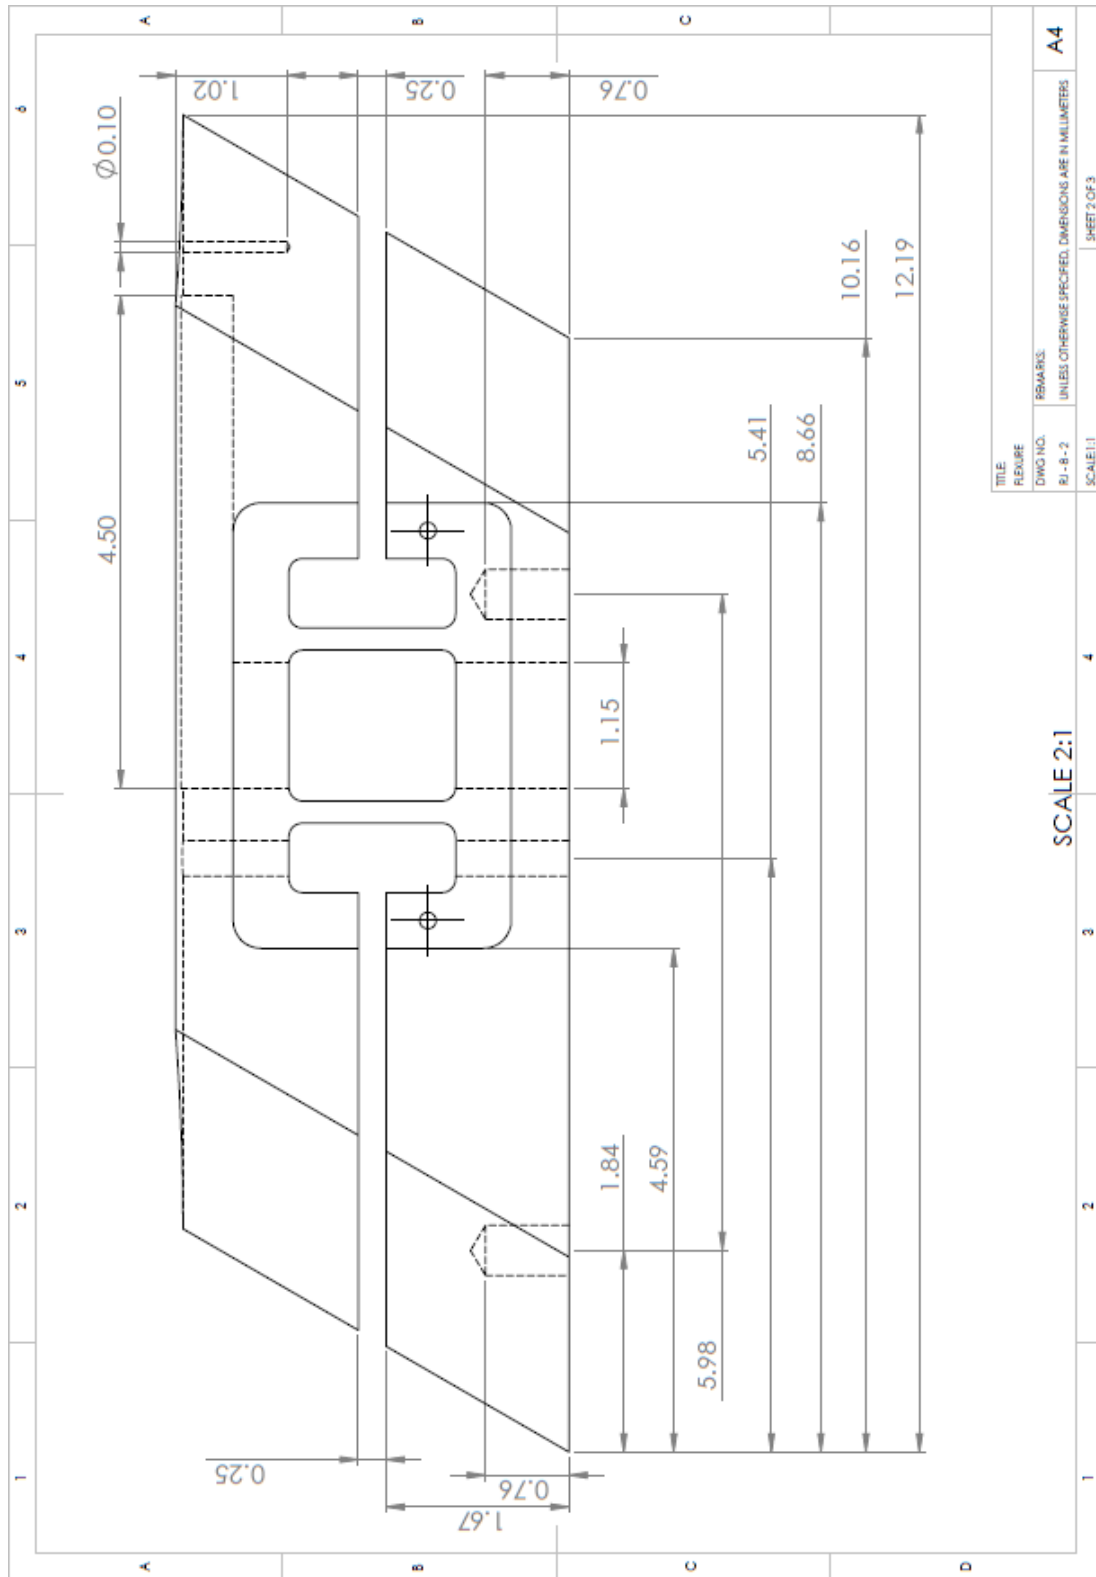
Part drawing: original flexure (RJ - 8 - 2). From [3].
